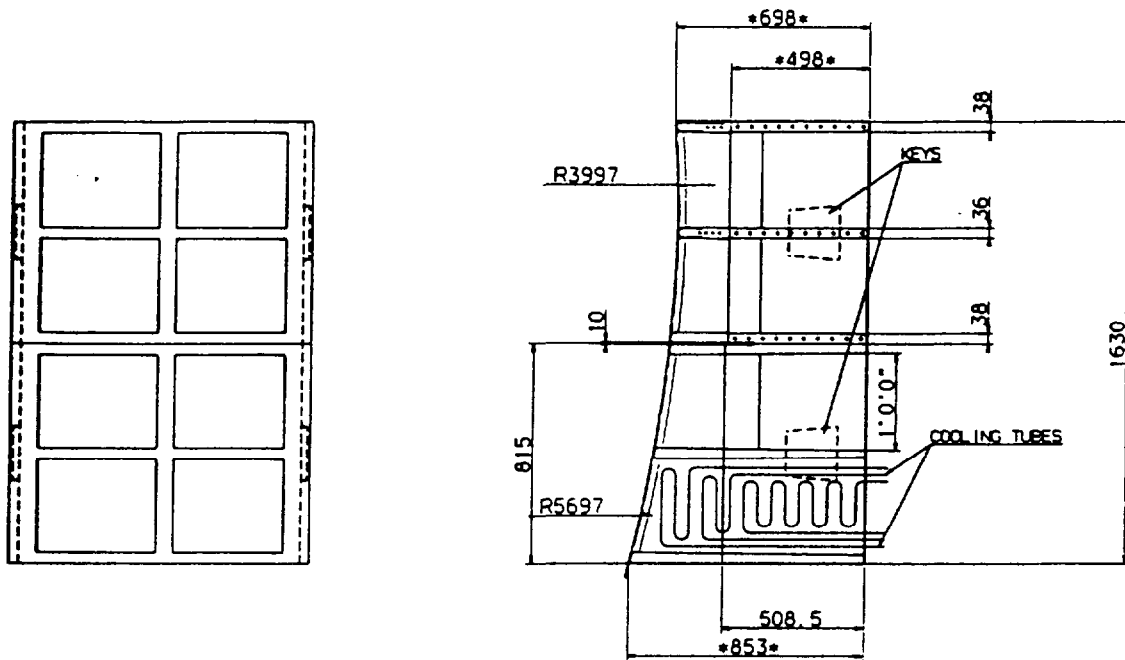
The structure for supporting the grill in the port/first wall.
